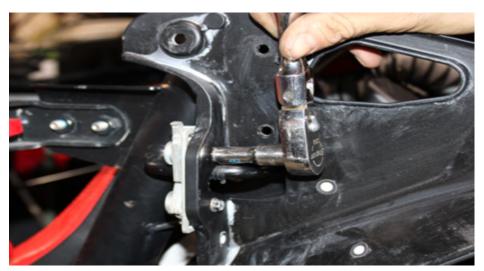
Remove Rear Door Latch using an 8mm Socket
